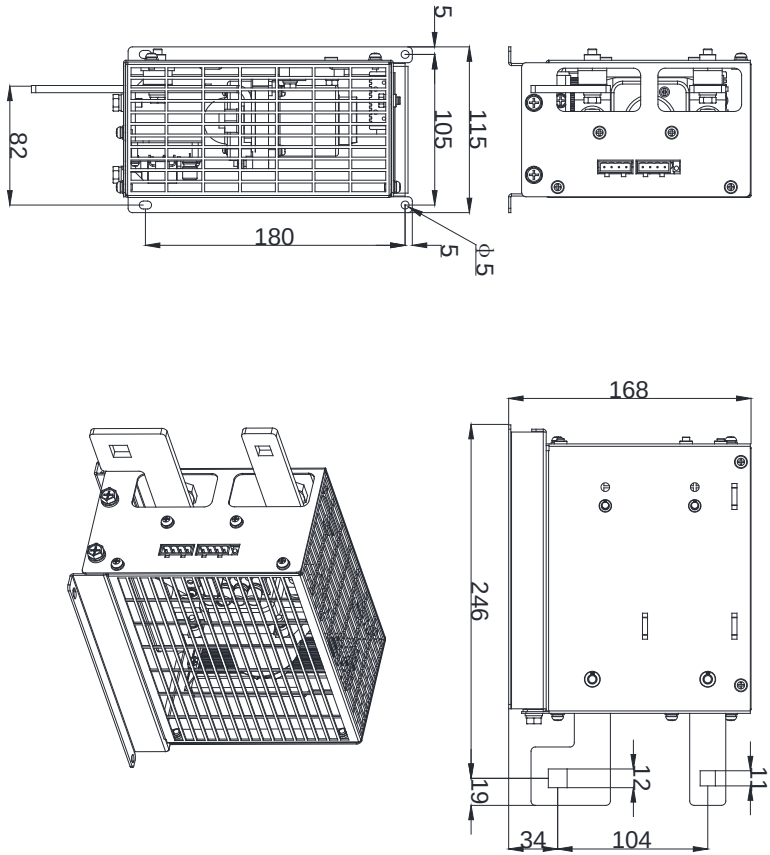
Dimensions of HST-6004 DC Bus Buffer Module
